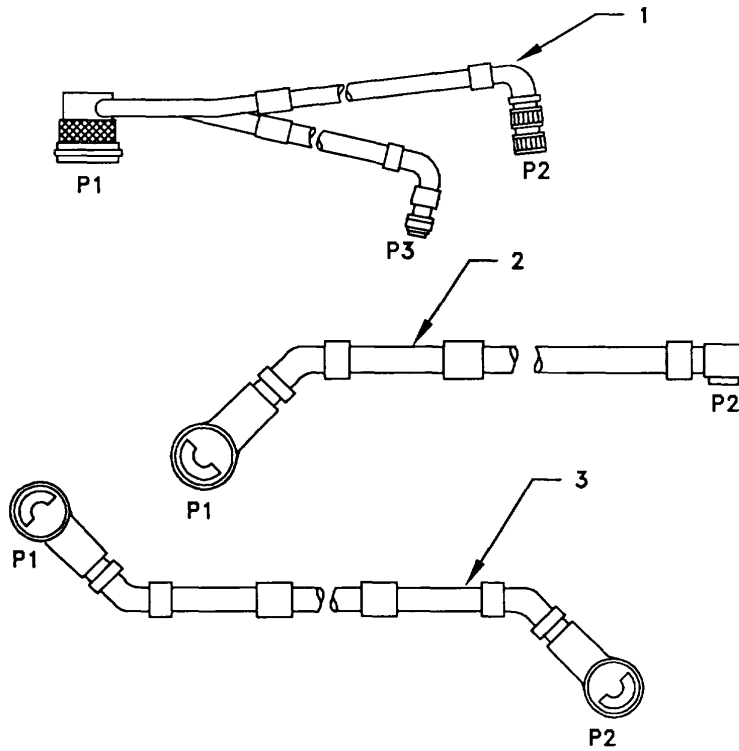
TSEC/KY-57 Illustrated Parts List
